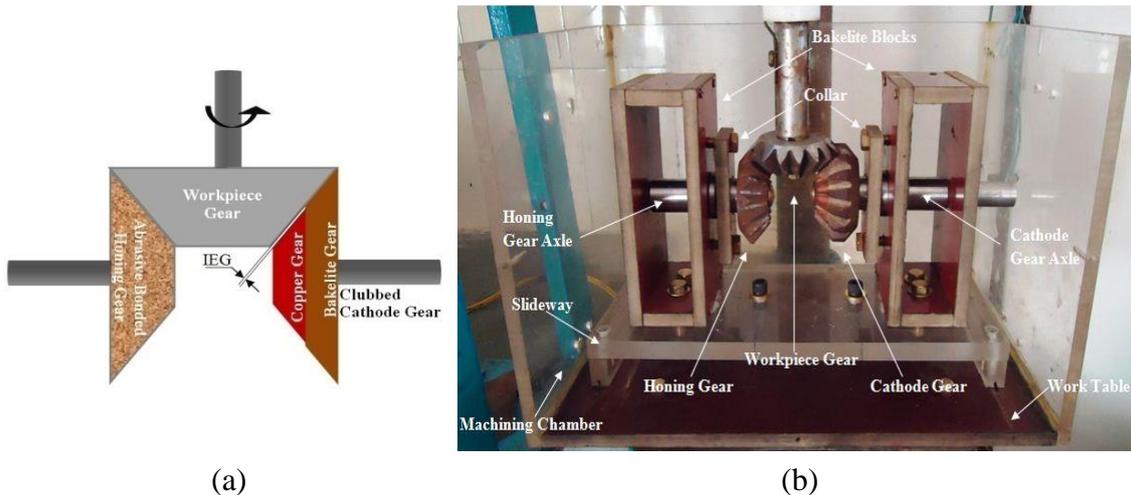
(a) Schematic of principle of ECH process of bevel gears; (b) photographic view of tooling system developed for ECH of bevel gears.
